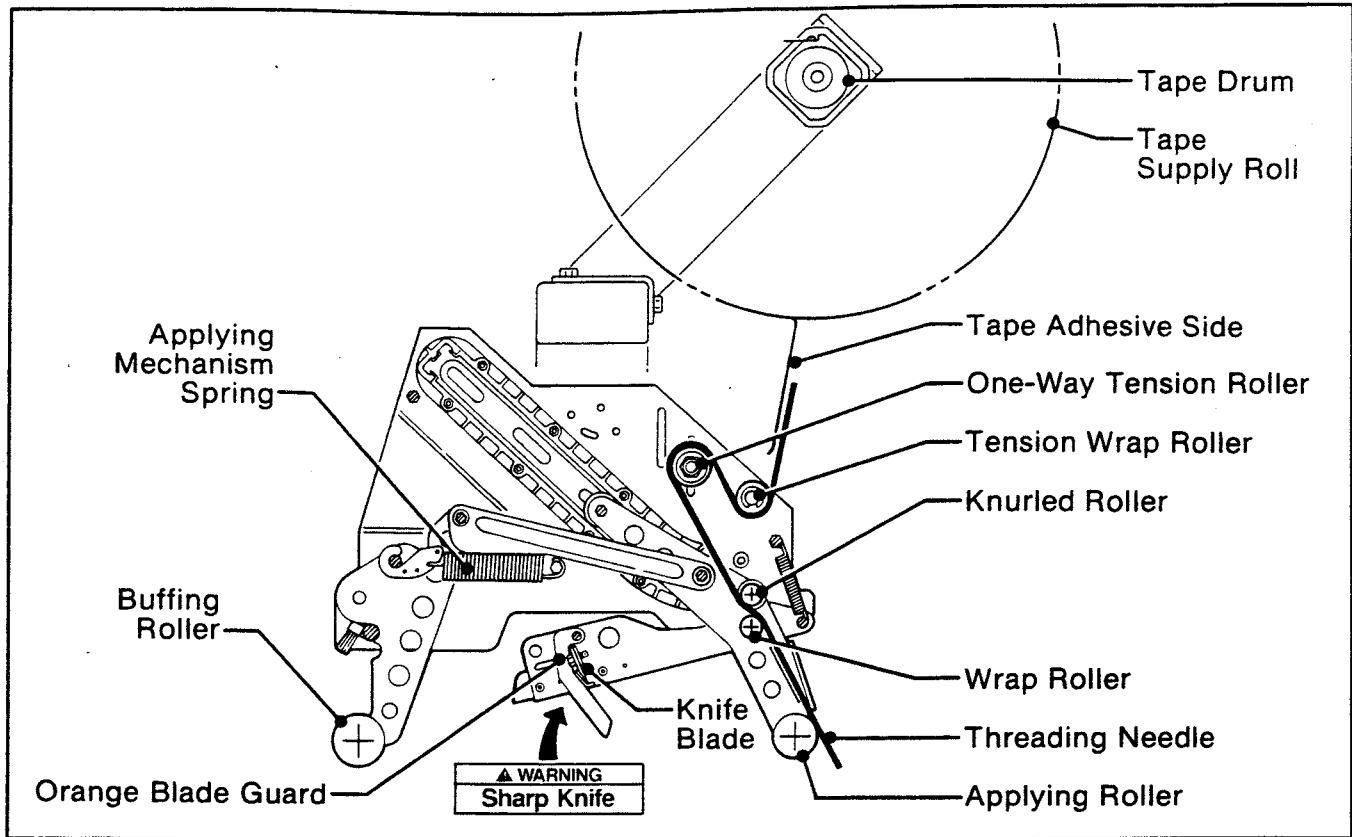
Tape Threading Diagram - Upper Taping Head - Left Side View
